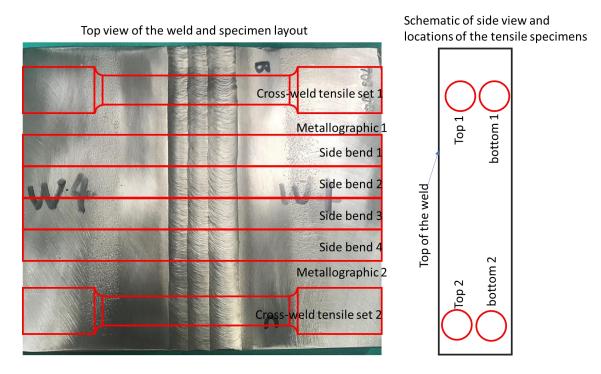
Layout of cross-weld tensile, side bend, and metallographic samples from W4
